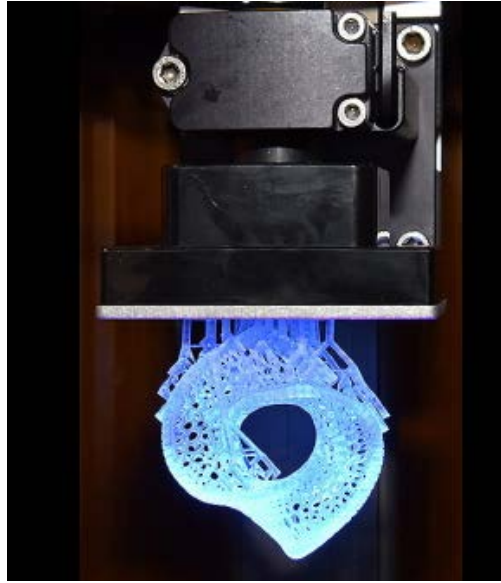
Build head of Ember 3D printer after printing process of a part
